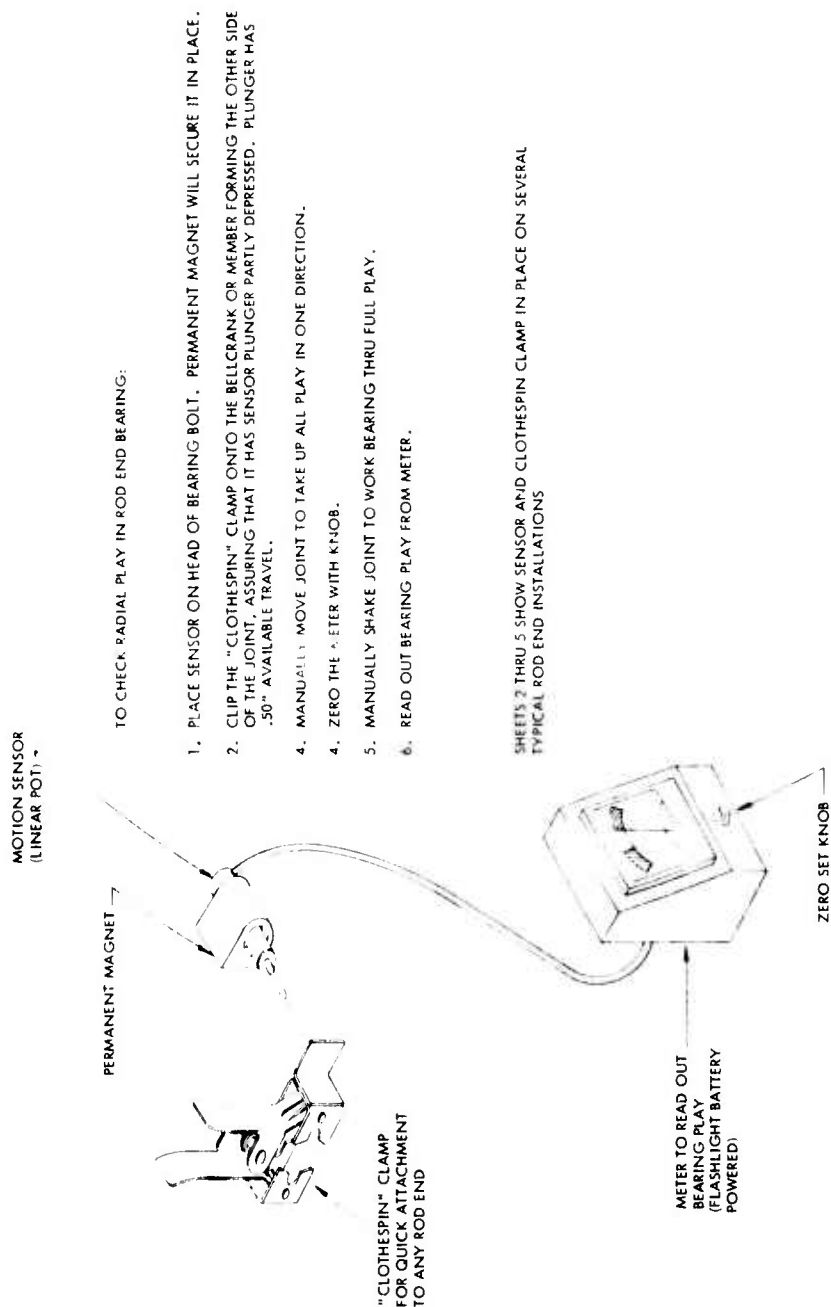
Rod End Bearing Play Sensor (Sheet 1 of 5).
